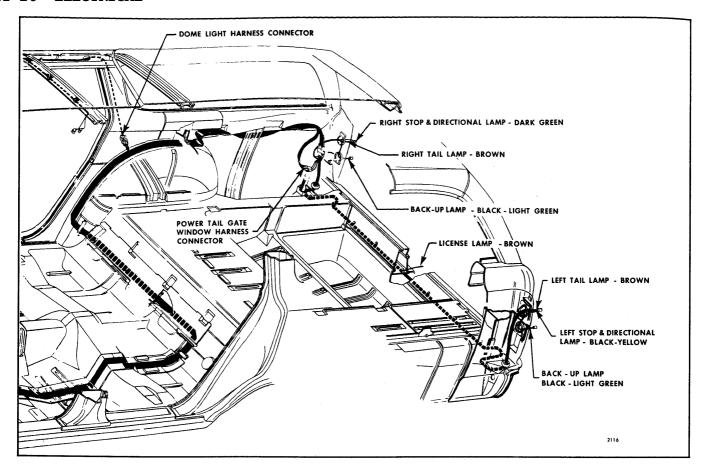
Right Side and Rear End Wiring - Chevrolet, Pontiac, Oldsmobile "A" Bodies
